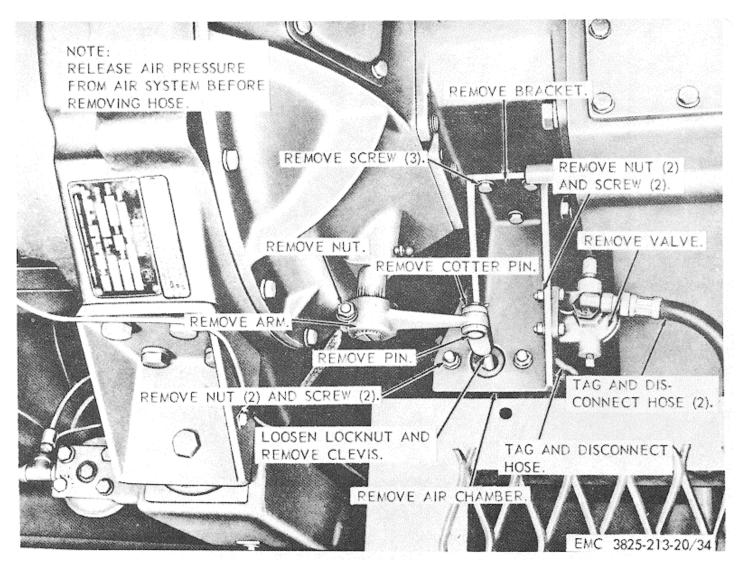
Clutch linkage, valve, and air chamber, removal and installation.
